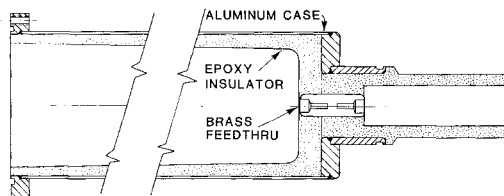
Cutaway drawing of housing with cast insulator and feedthrough.
